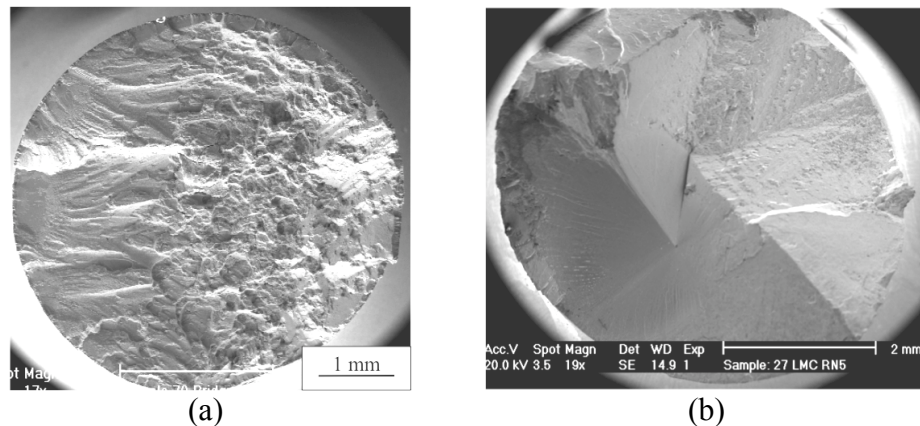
Fracture surface of a nickel-base superalloy exemplifying (a) a full fracture perpendicular to the applied stress axis and (b) a fatigue crack which emanated from a casting pore and propagated crystallographically.
